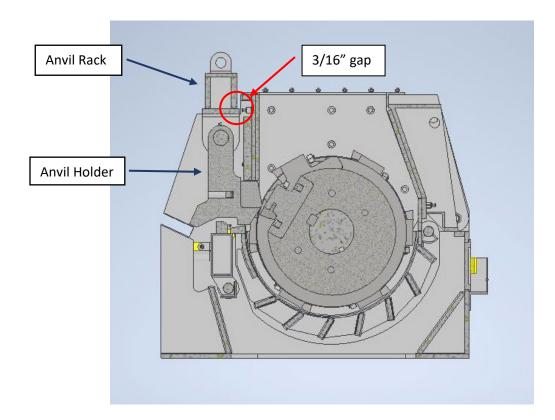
Cross Sectional View of Hog with Anvil Rack Assembly
